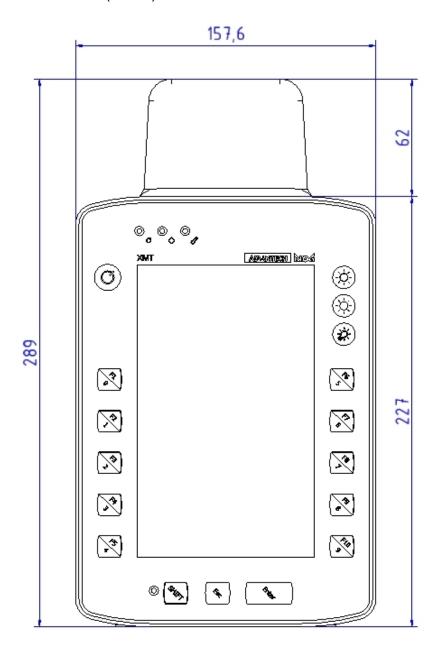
Dimensions DLoG XMT 5/7 front view
